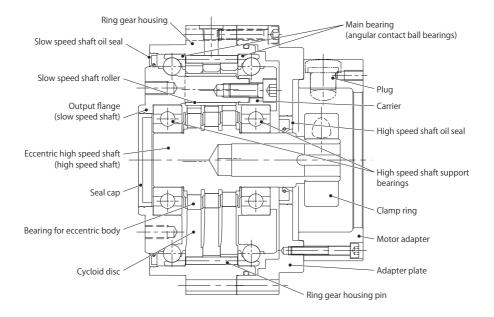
(Example: DA Series Gearhead for Servo Motors)
